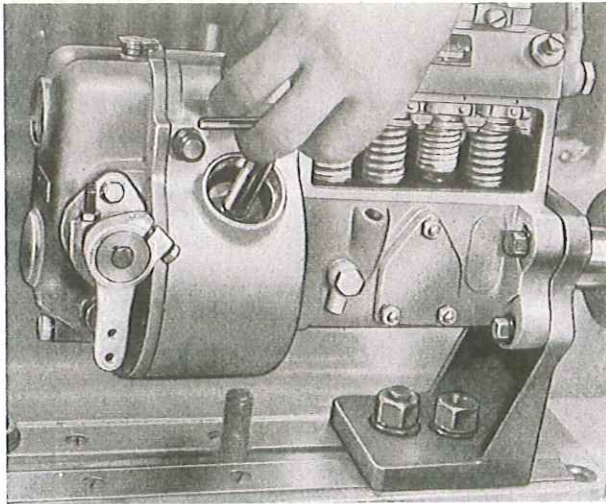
Adjusting the fly-weight opposing springs using wrench A 527008.
